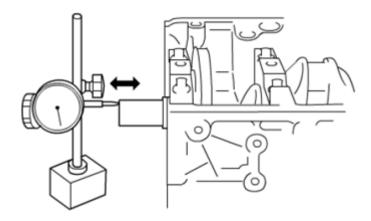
Checking Crankshaft Thrust Play Courtesy of SUZUKI OF AMERICA CORP.
